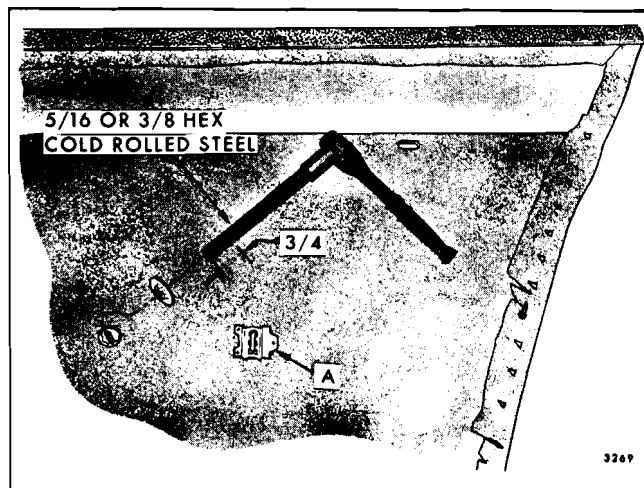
Door Trim Pad Molding and Applique Removal
